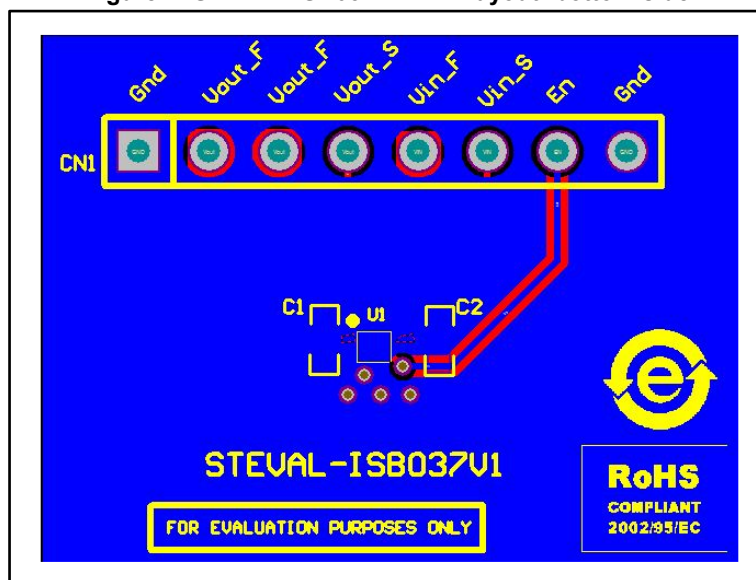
STEVAL-ISB037V1 PCB layout: bottom side
